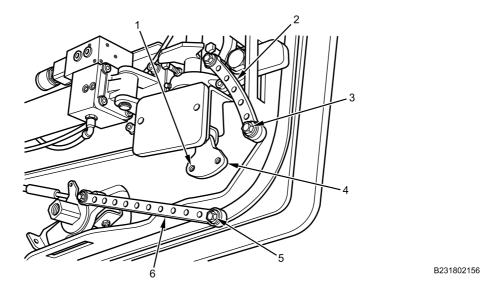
Combat Lock Shaft Lever and Vertical Shaft Lever Removal from Combat Lock Bell Crank.
